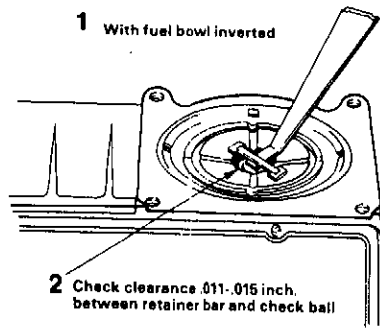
PUMP INTAKE CHECK BALL ADJUSTMENT
